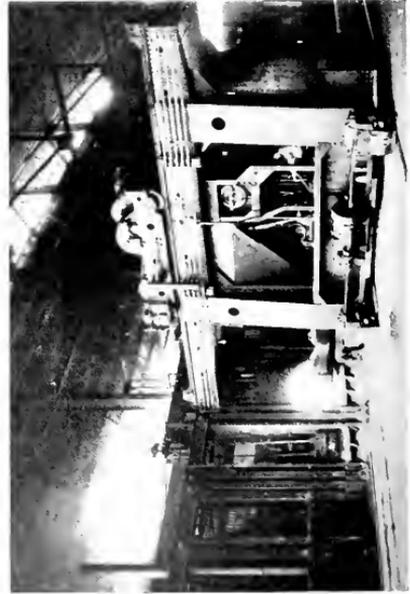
Alliance High-type Charging Machine in Open Hearth Dept.
